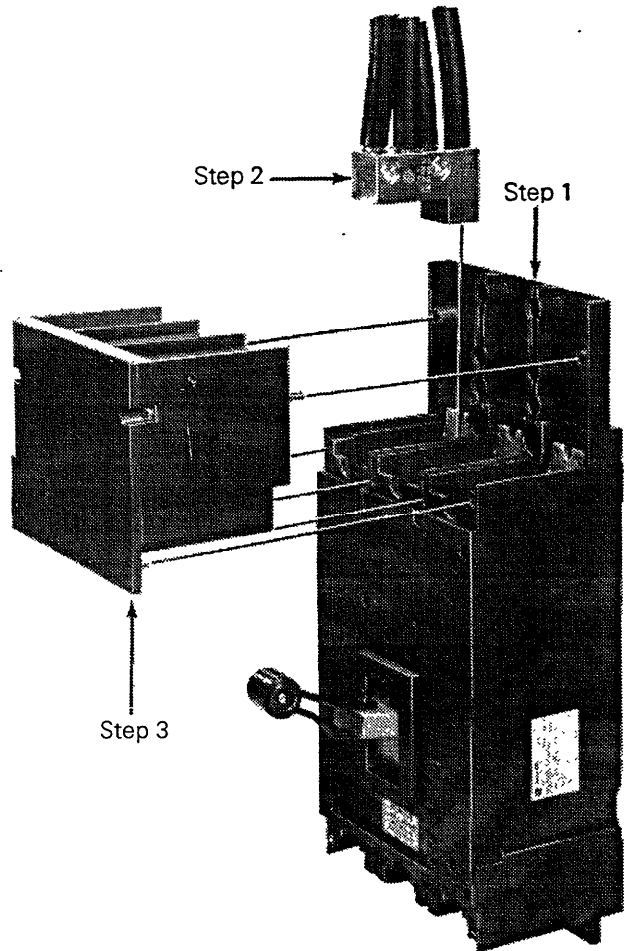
SKP Frame terminal-cover assembly for upper (line) end.
